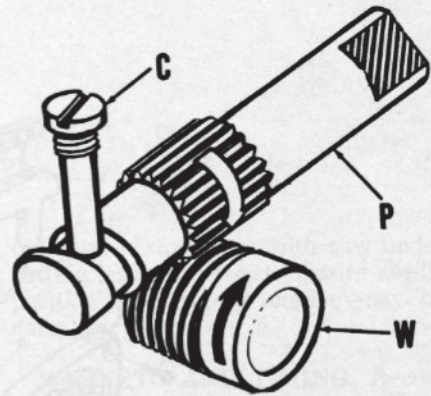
Schematic diagram of automatic chain oiler pump operation. Worm gear (W) on crankshaft drives (rotates) pump plunger (P). Cam cut in plunger rides against cam screw (C) causing plunger to move back and forth as it rotates. Flat on plunger acts as a valve as it opens intake port on downward stroke and outlet port on upward stroke.
